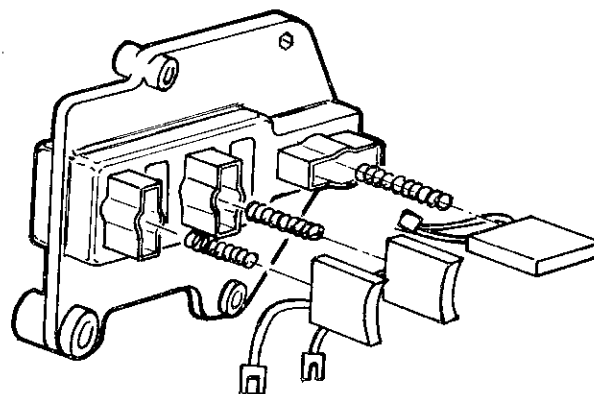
REMOVING ALTERNATOR BRUSHES
